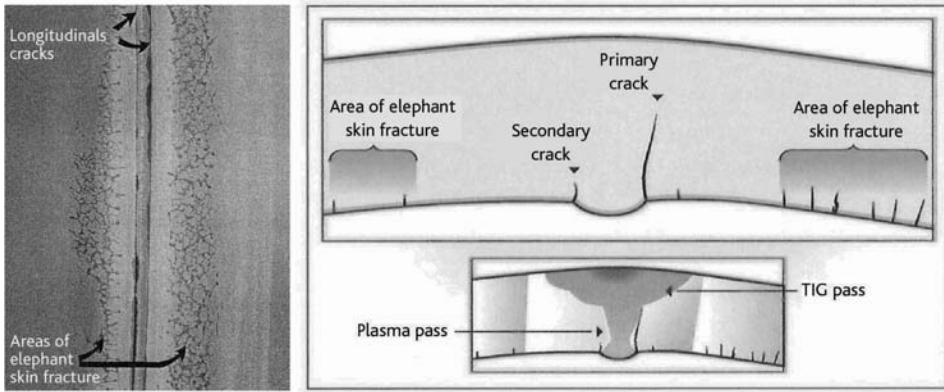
The inside of the pipe elbow that caused the leak that occurred at the Civaux NPP in 1998. Crazing-like fractures are visible on either side of the weld bead. © EDF (left) and IRSN—Source: EDF (right).
